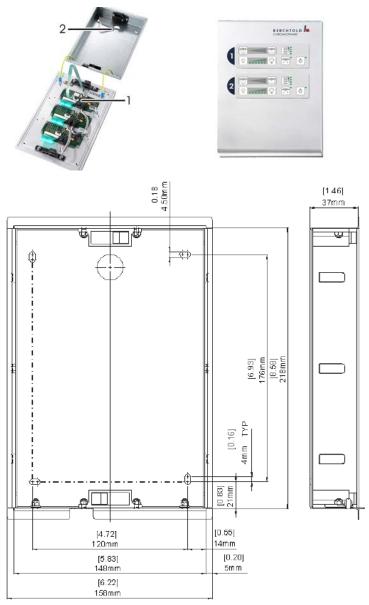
Dimensional drawing, back box for recessed mount wall control unit with keypad and touchscreen (dimensions are in [inches] mm)
